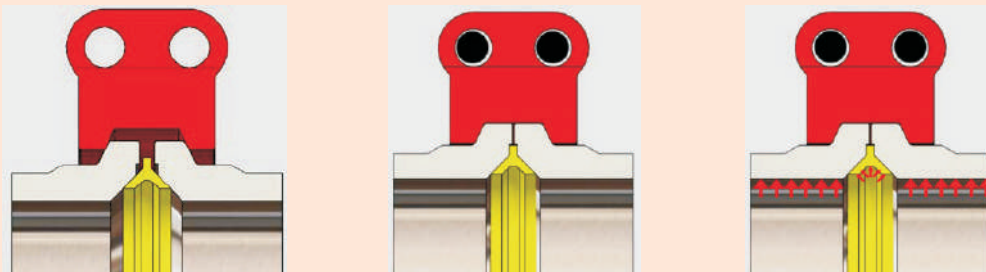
(a) Components assembled prior to bolt tightening (b) After bolts are tightened (c) In service
